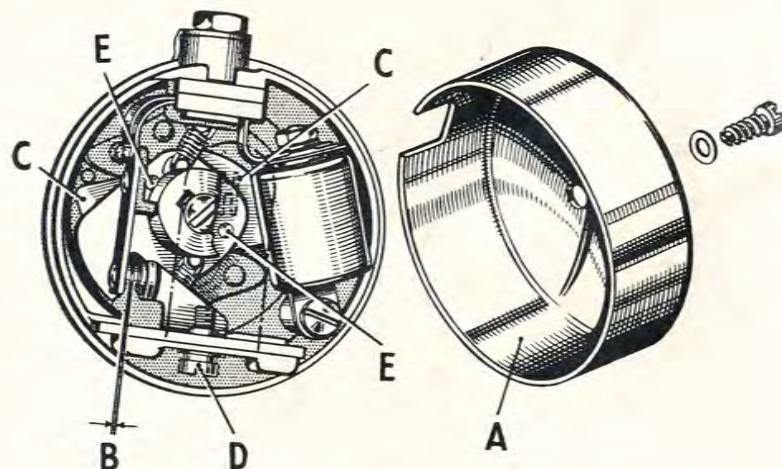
Contact Breaker and Auto-Advance Mechanism.
